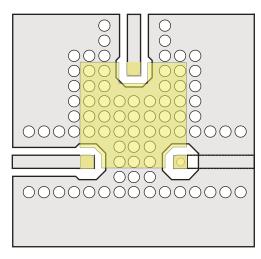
ACMD-7605 Superposed on PCB Layout (top view).
